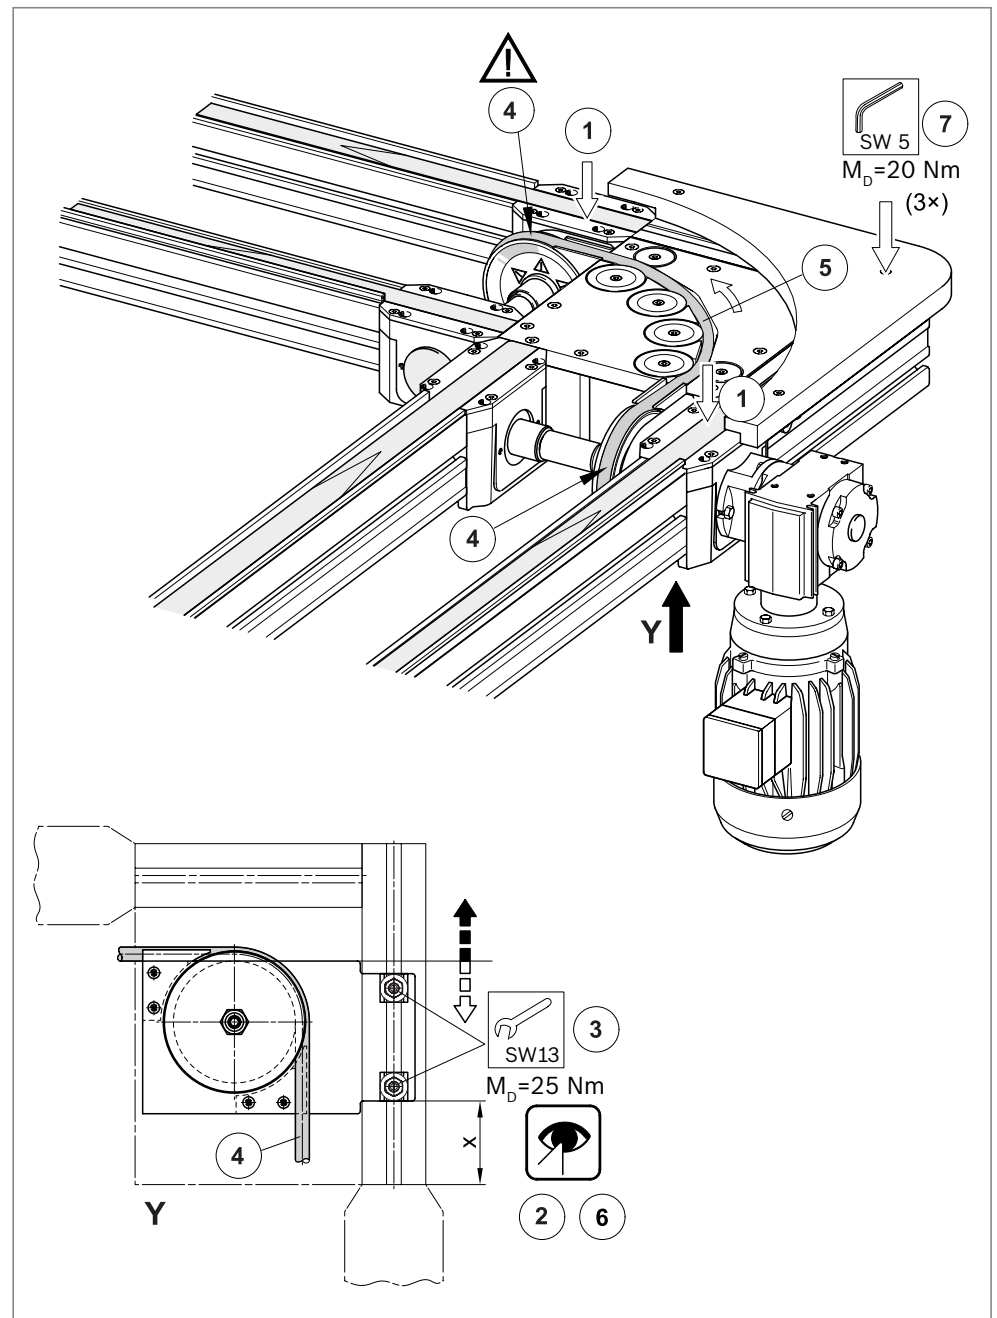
Installing KE 2/90-O on BS 2/K (4) (drive unit of KE2/90-O)
